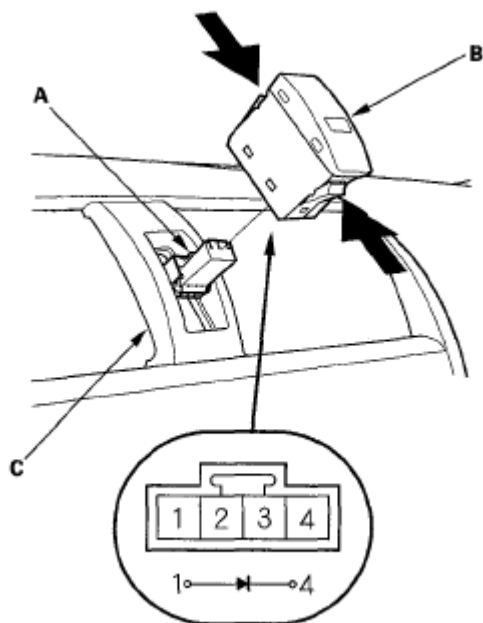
Disconnecting 4P Connector From Passenger's Airbag Cutoff Indicator
